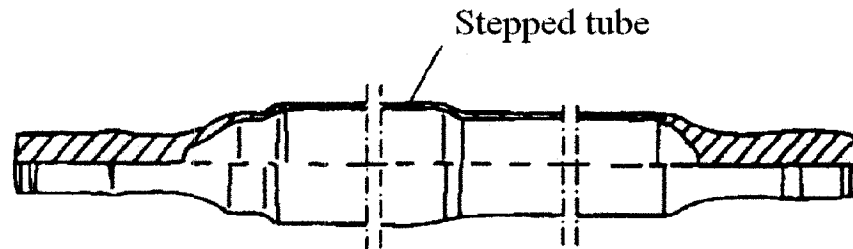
Both drive shafts ends welded to multi-stepped middle section (Thick/thin wall thickness). P. Amborn, H. Frielingsdorf, S.K. Ghosh and K. Greulich (1995) [2]
